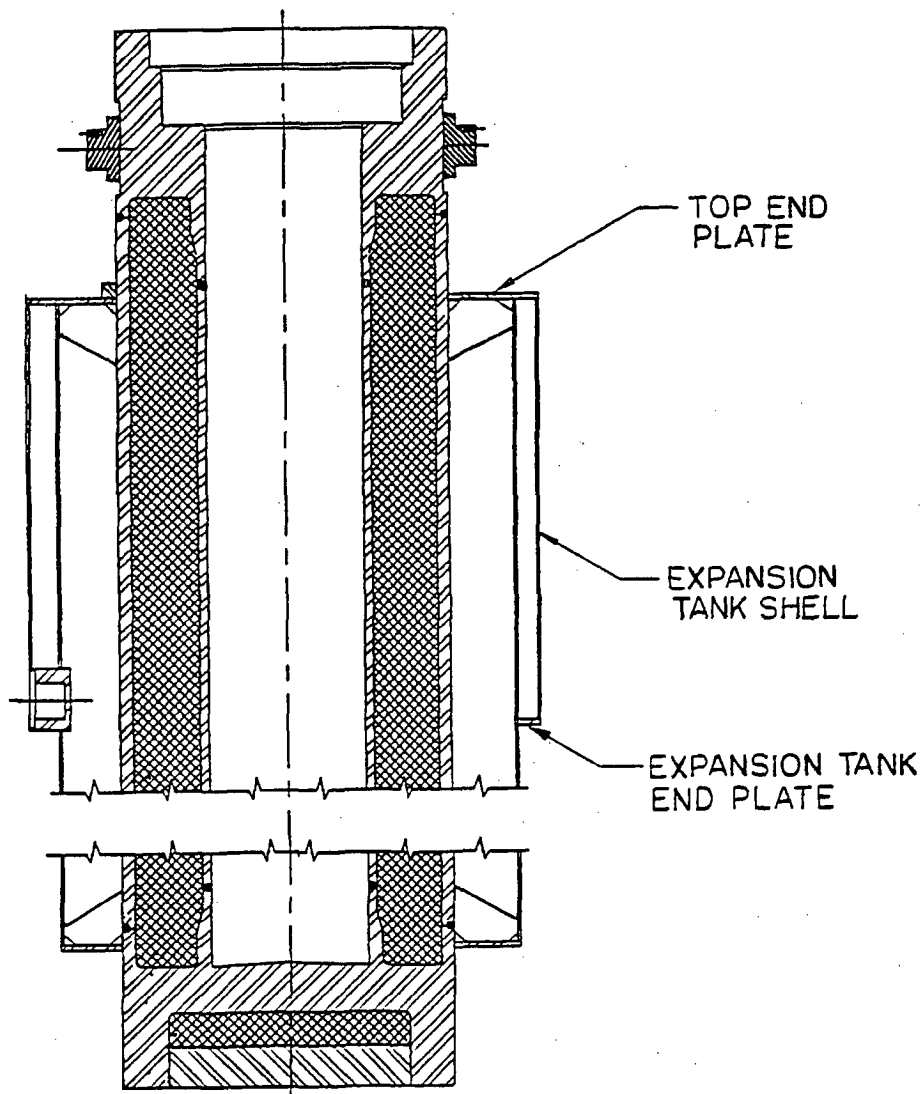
Expansion Tank Top and Bottom End Plate
